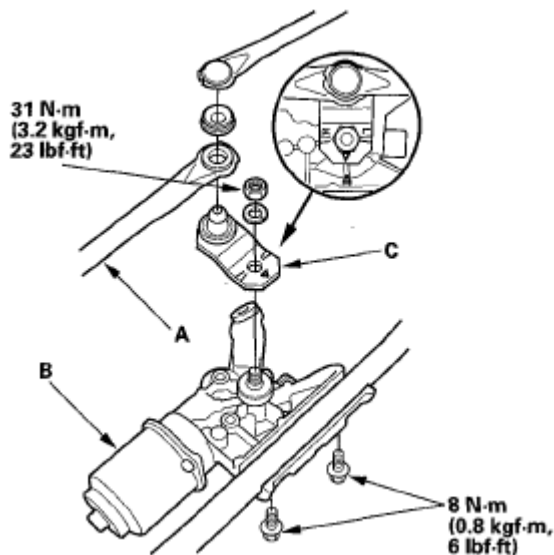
Identifying Wiper Linkage And Wiper Motor Bolts And Nut With Torque Specifications
